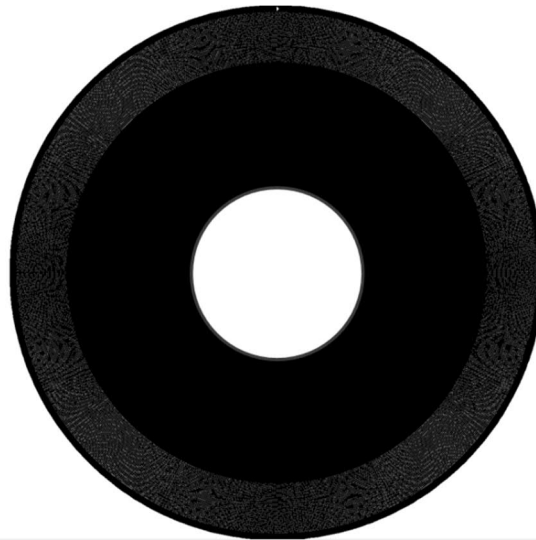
Code disk M7 modified with a hole for hollow shaft mounting.
